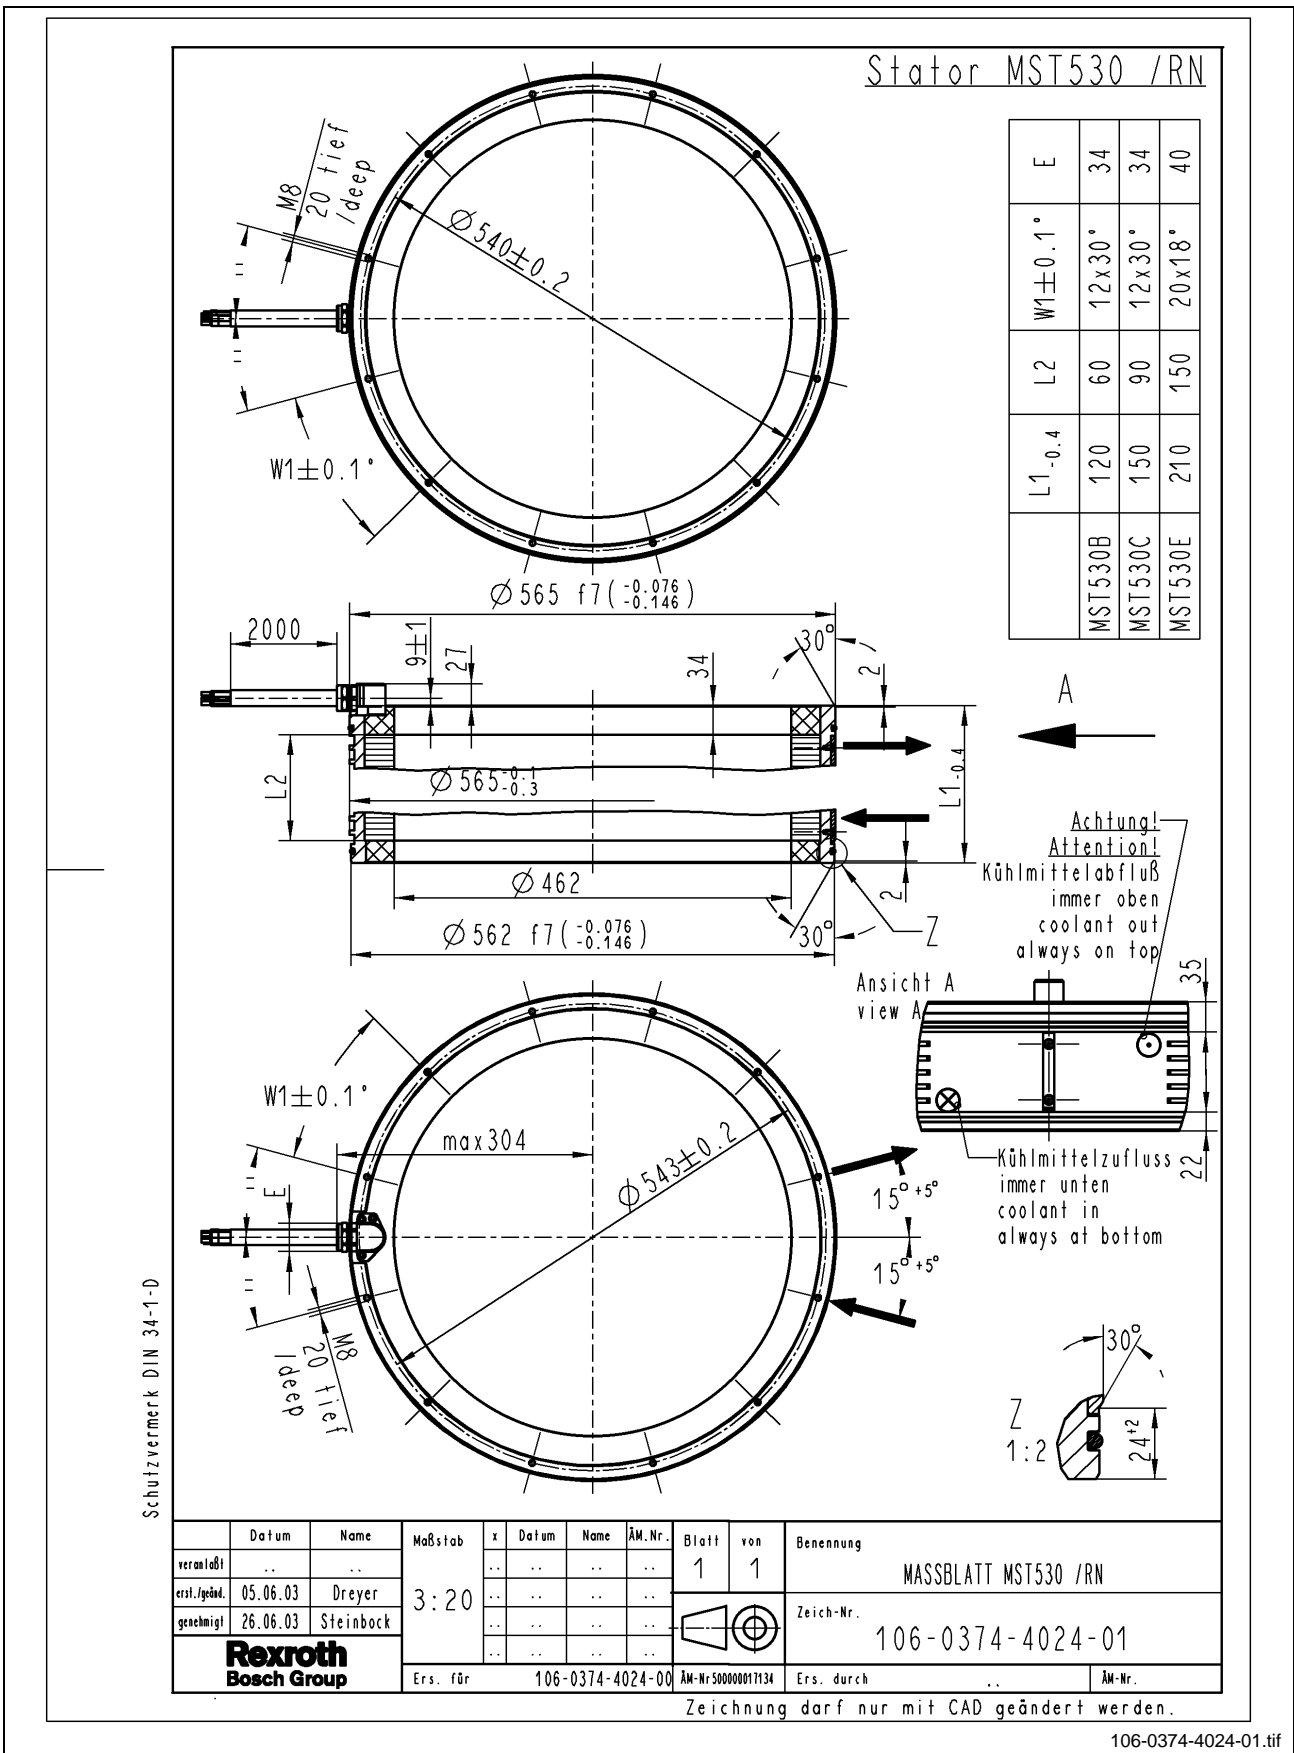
Dimension sheet MST530, electrical connection "RN"
